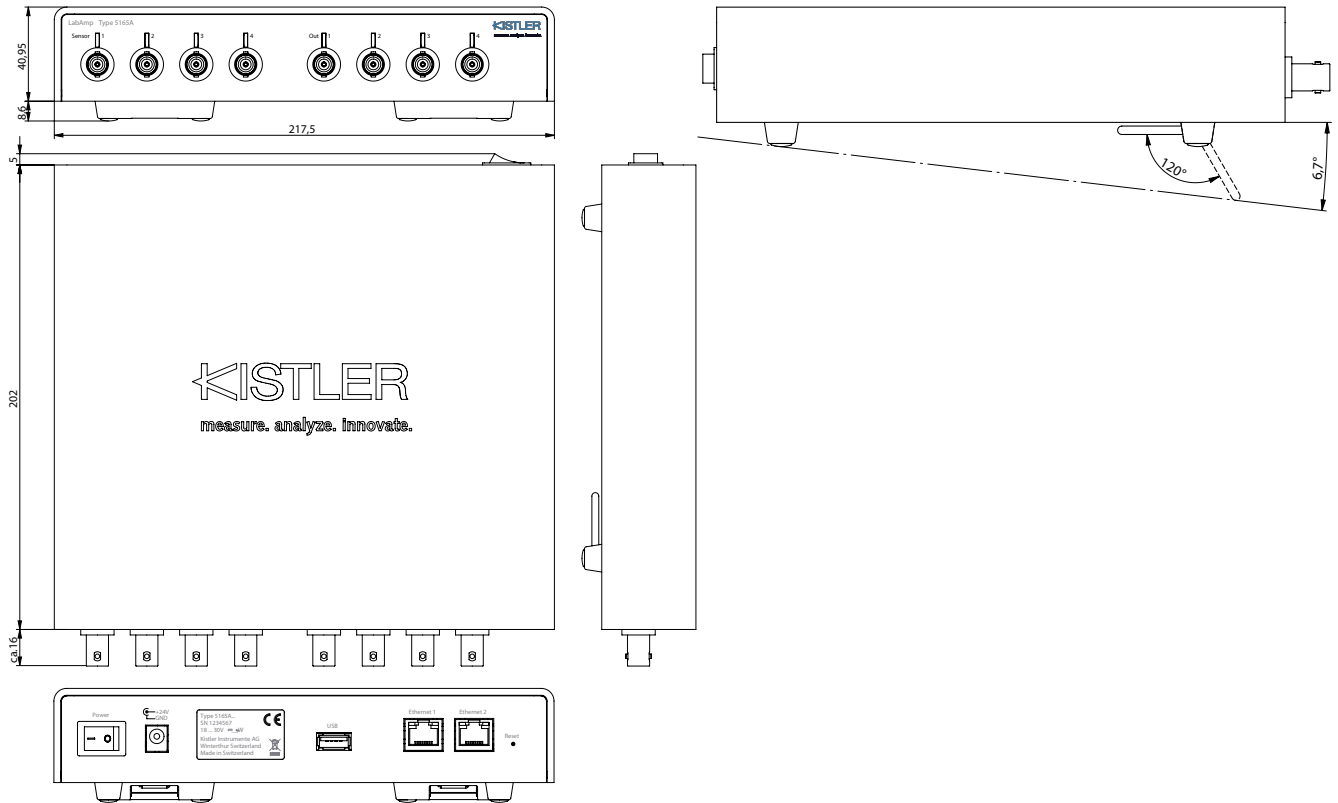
Dimensions of Kistler LabAmp Type 5165A4
